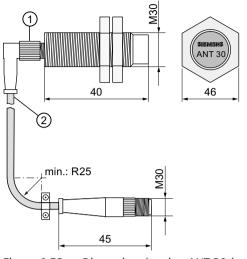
Dimension drawing ANT 30 (stainless steel variant) All dimensions in mm.
